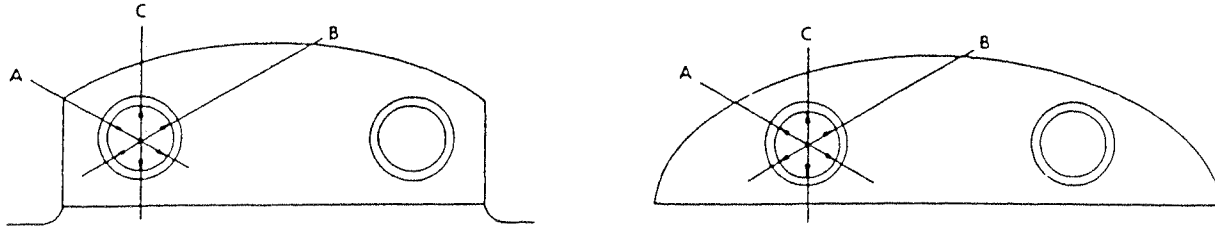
COUNTERWEIGHT BUSHING DIAMETER CHECK.
